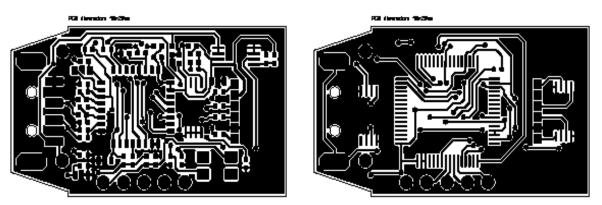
eZ430-RF, USB Debugger, PCB Layout
